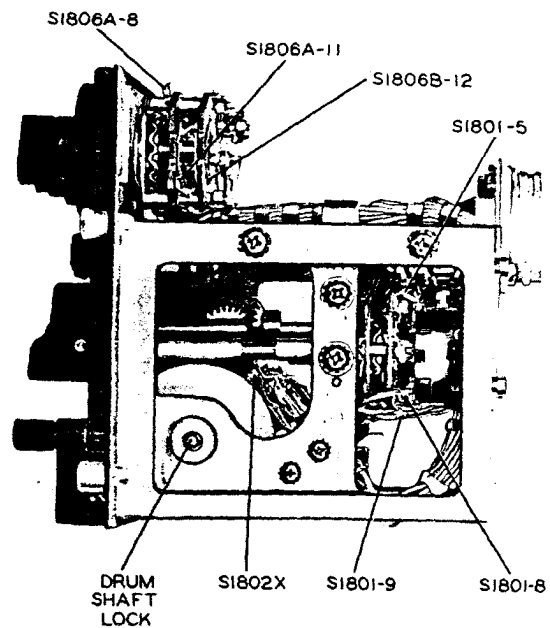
Radio Set Control C-1607/ARC-52, Right Side View, Cover Removed
